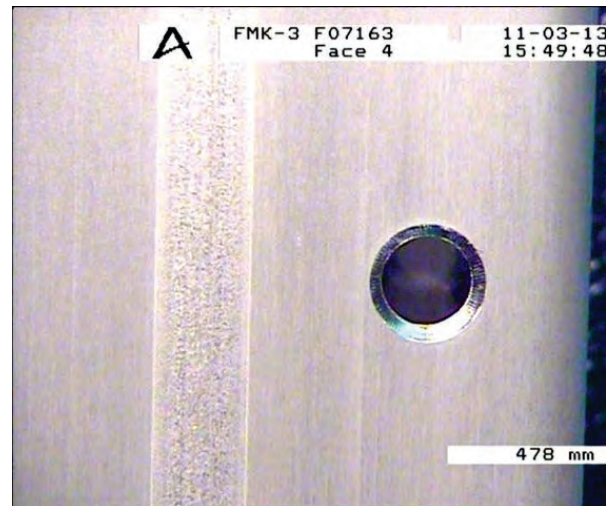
KU8127 (1 cycle assembly) channel after cutting out coupon.
